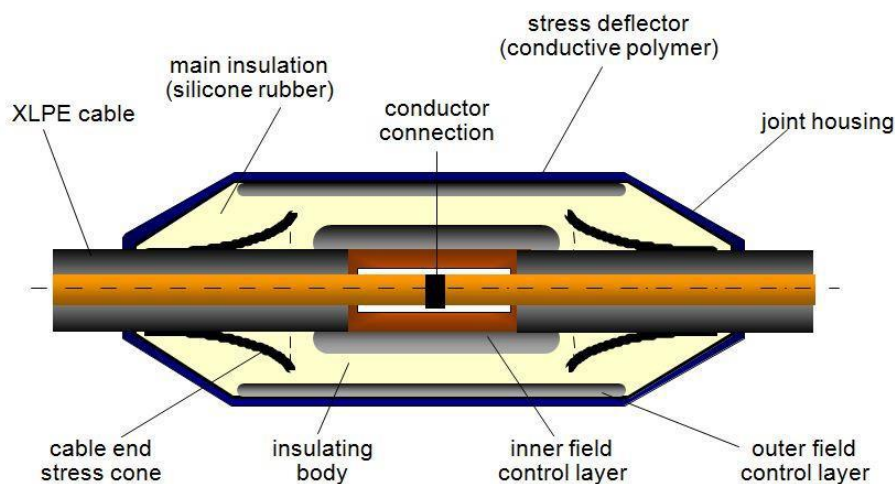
Sketch of a cable joint (Source: campbellwhite.com)
